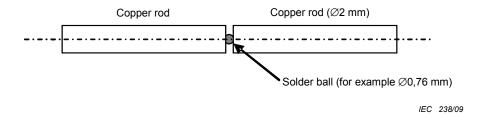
Schematic illustration of the single solder joint for mechanical fatigue testing
